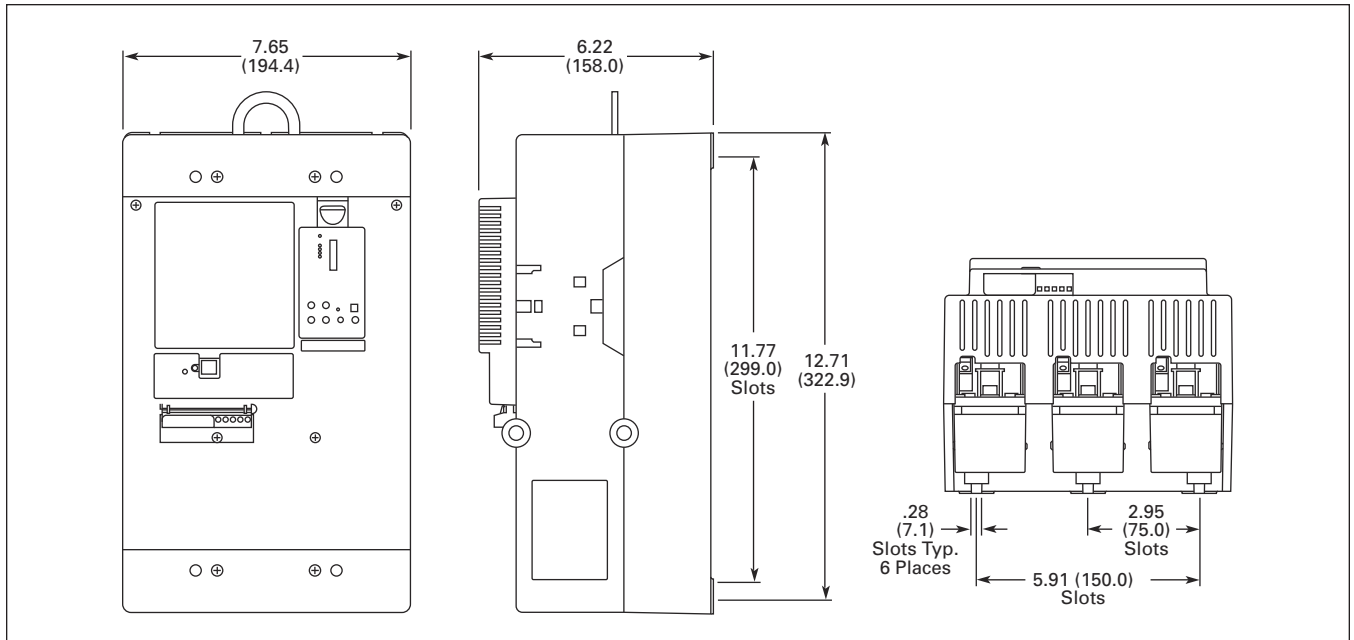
T-Frame (200 mm) S801 Approximate Dimensions in Inches (mm)
